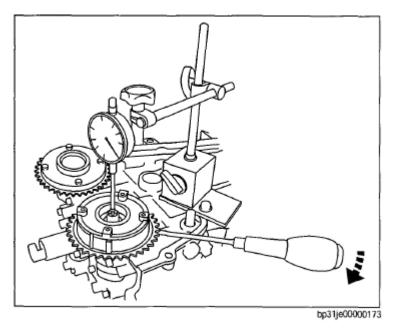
Measuring Camshaft End Play Using Dial Gauge
